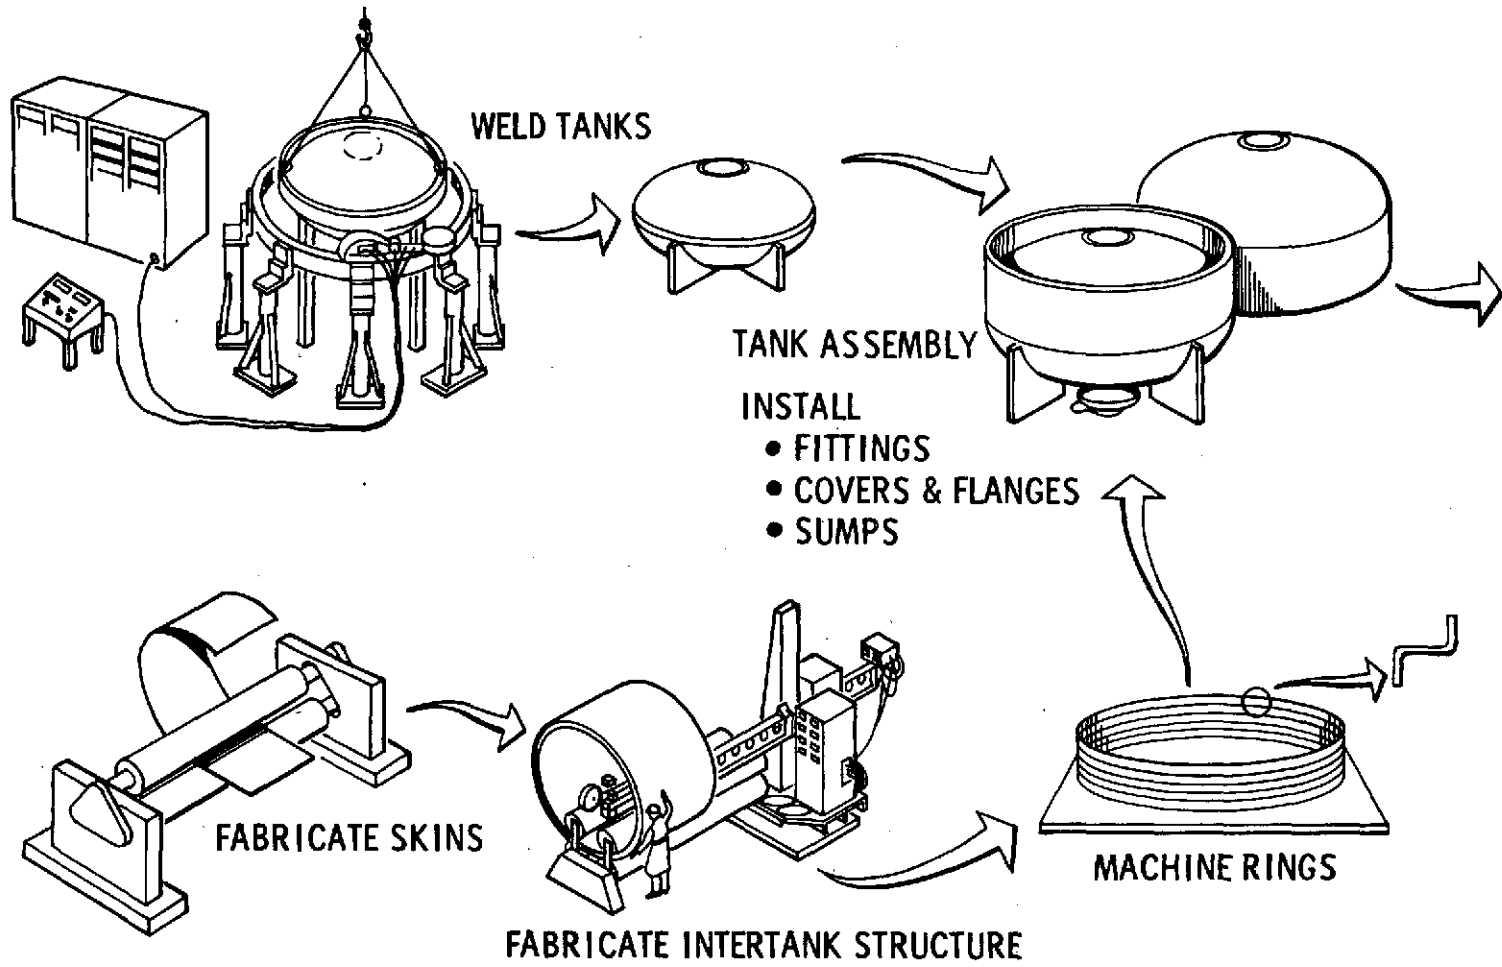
(Part 2) Propellant Tank Assembly
